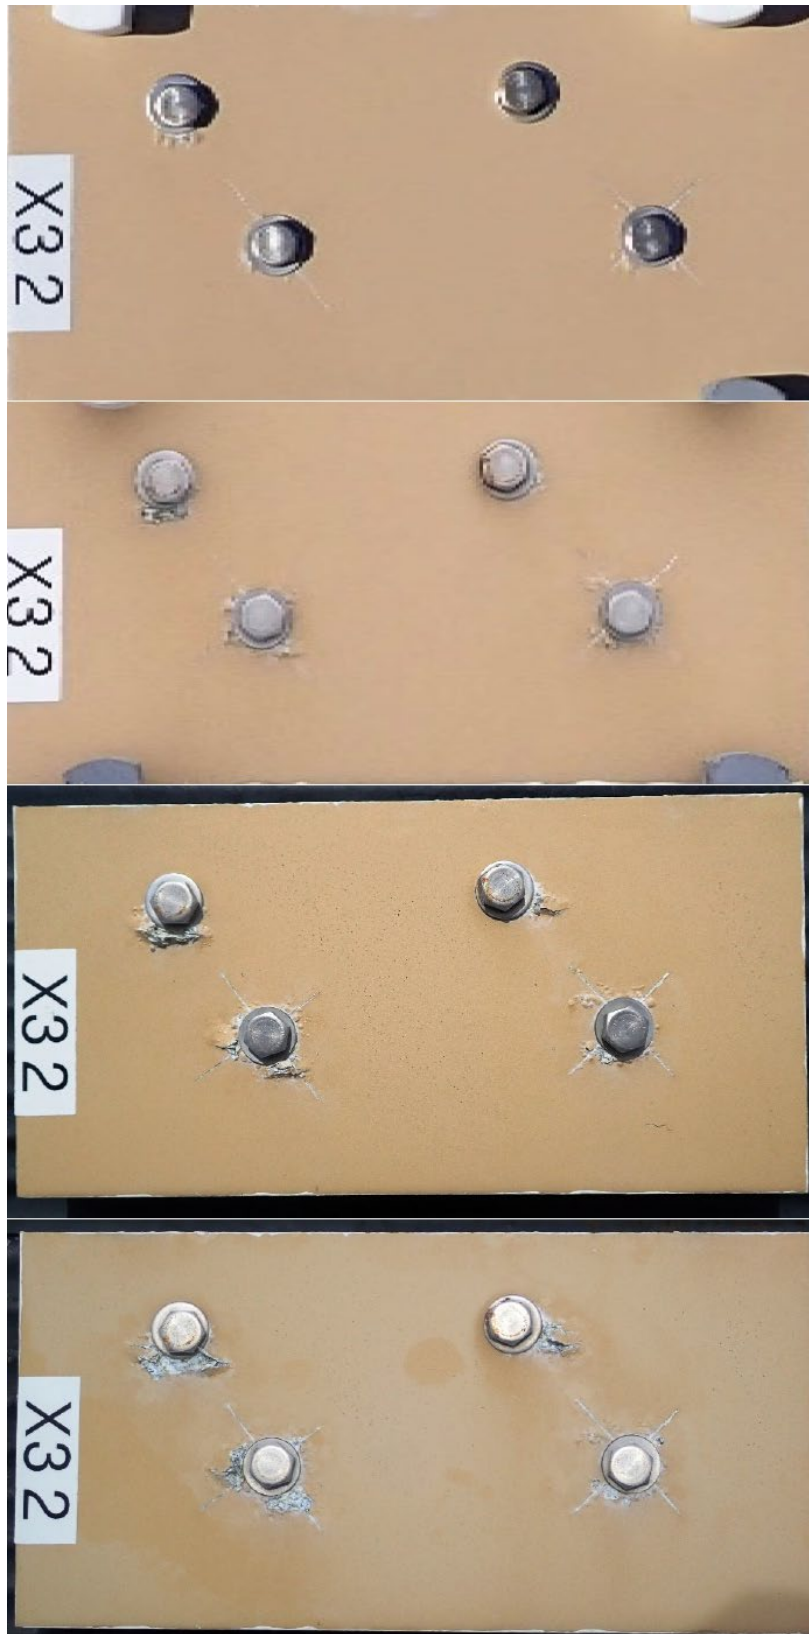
Panel X3-2 top-bottom: 3-, 6-, 9-, and 12-month inspection images
